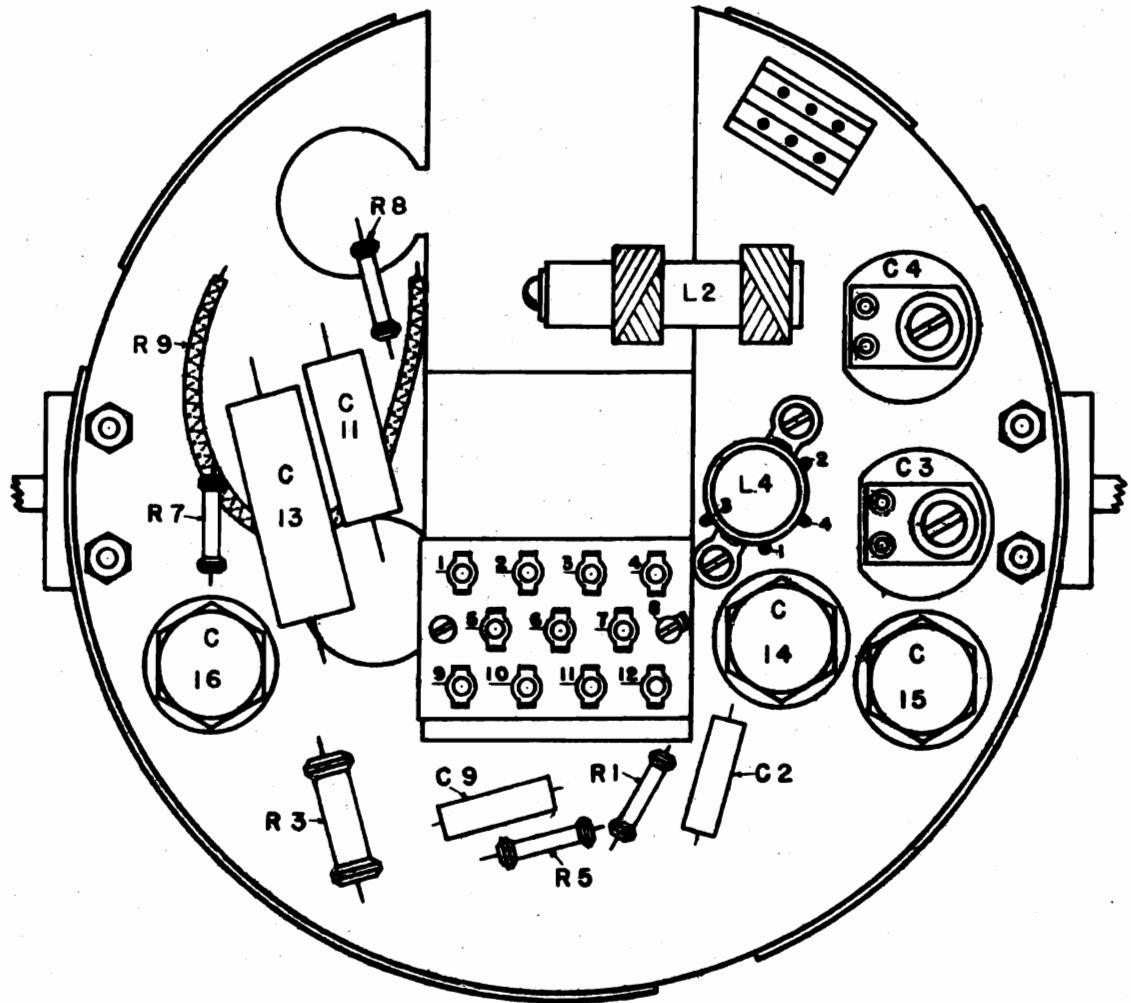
TOP VIEW OF CHASSIS - MODELS 700 - 701 - 702
